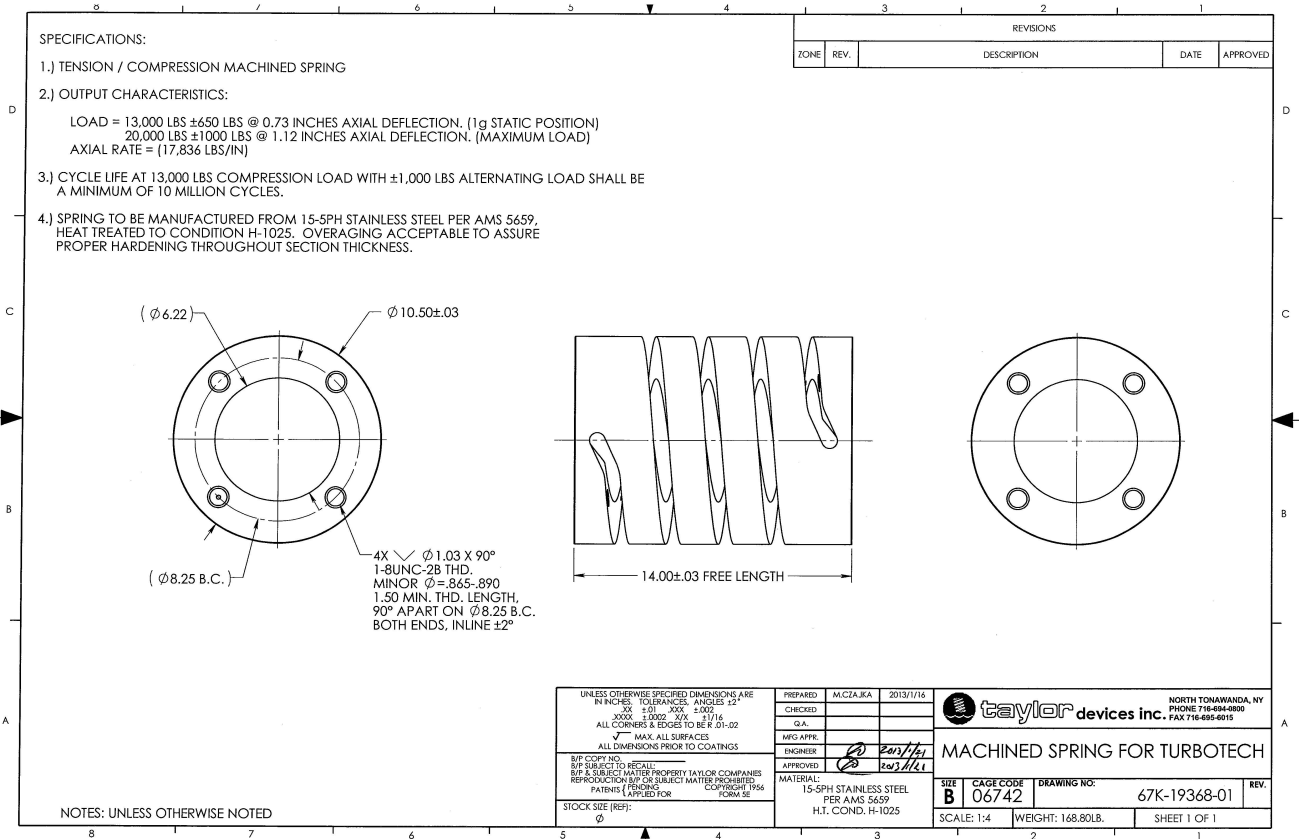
Detail drawing of machined spring produced by Taylor Devices.
